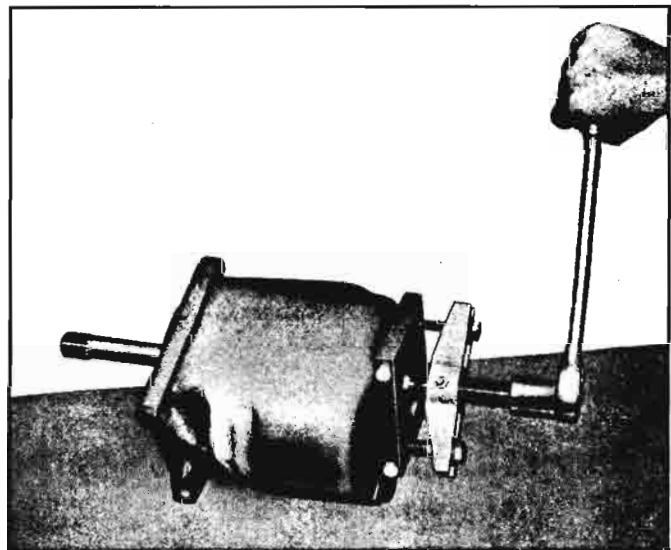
D-33—Removing Clutch Gear Bearing with Puller J-8880
